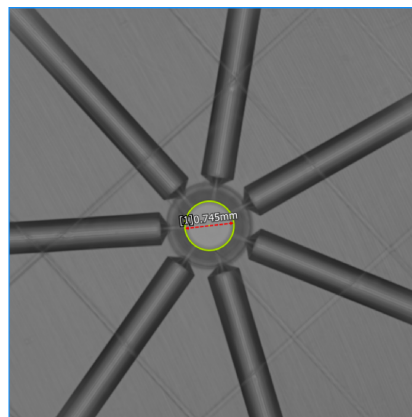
Micro-CT cross-section of a Bruker ceramic air-bearing reference geometry, showing the central ID and radial feed passages used to support a sub-millimeter MAS rotor.
